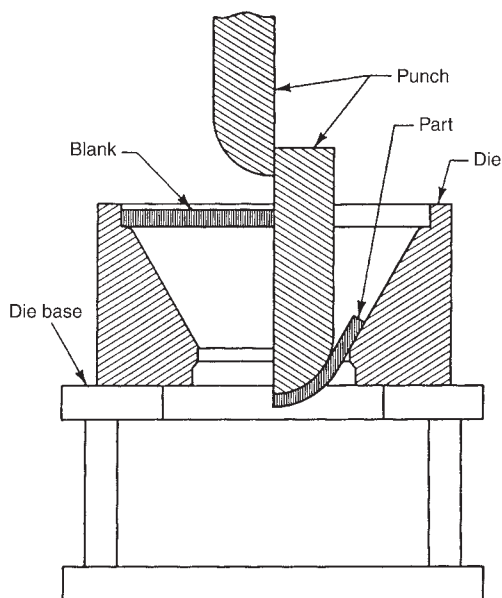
Cross-sectional view of a conical die used to deep draw a thick-walled hemishell of beryllium. Left side shows the die punch with blank in place before forming the part. Right side shows the formed part just prior to exiting the die. Source: Blakeslee 1979
